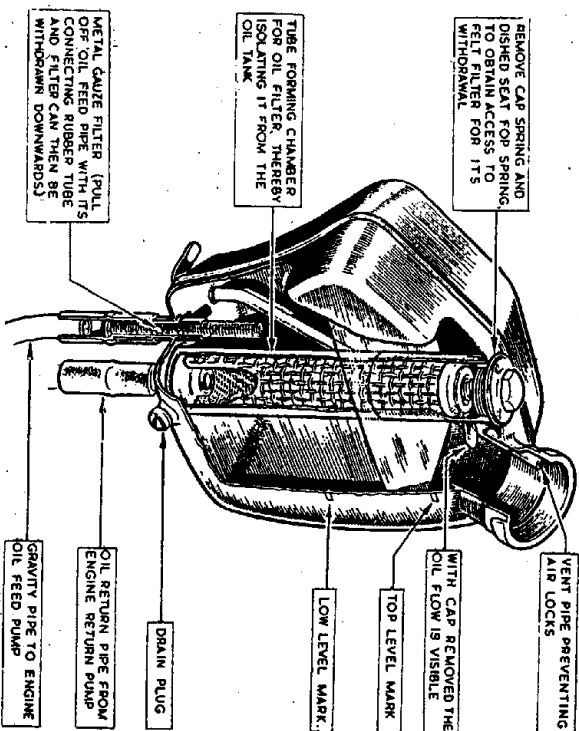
CUTAWAY VIEW OF THE OIL TANK FITTED TO PRE-1955 MODELS.
